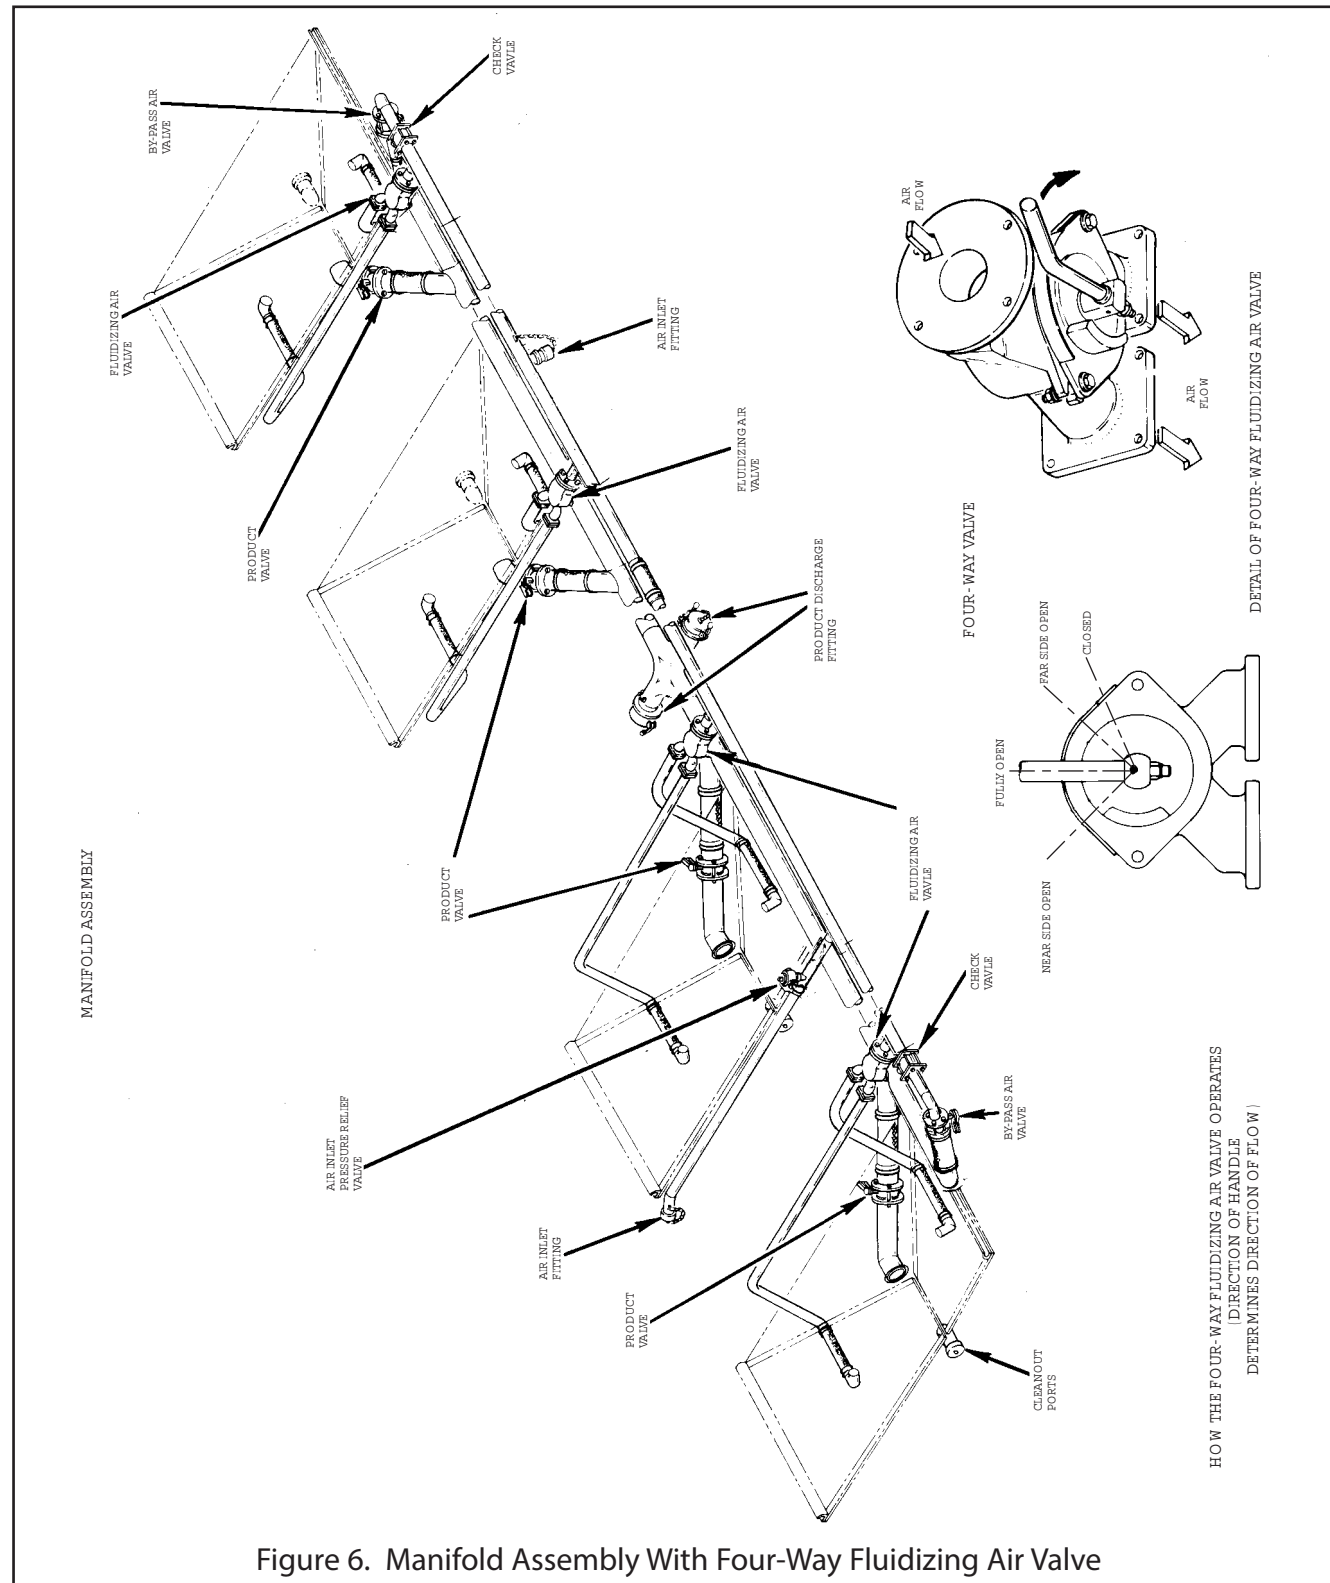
Manifold Assembly With Four-Way Fluidizing Air Valve
